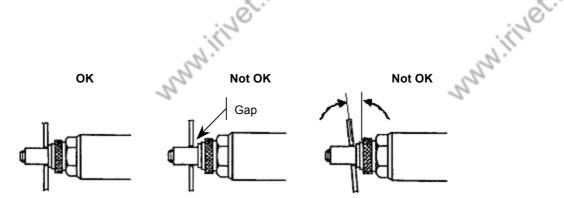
Proper insertion of POP NUT™ threaded inserts into an application
